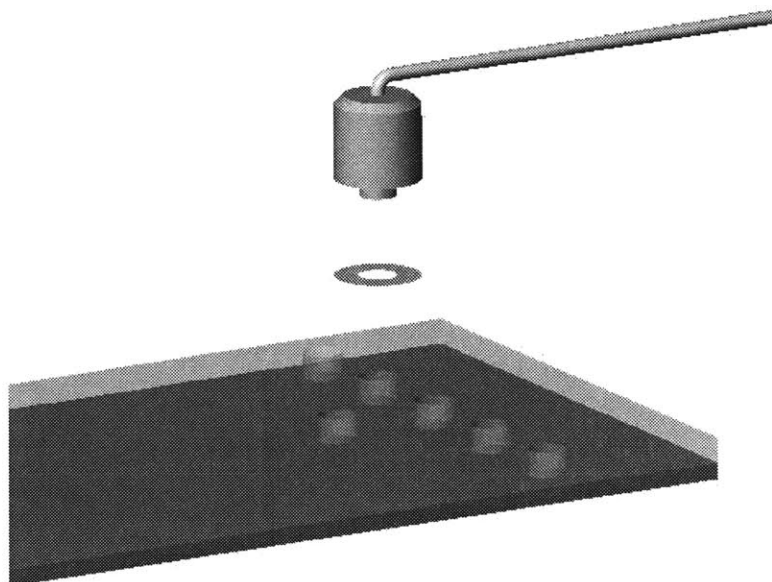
Exploded view, showing the location of the adhesive gasket between the glass-silicon device and the fluidic fitting
